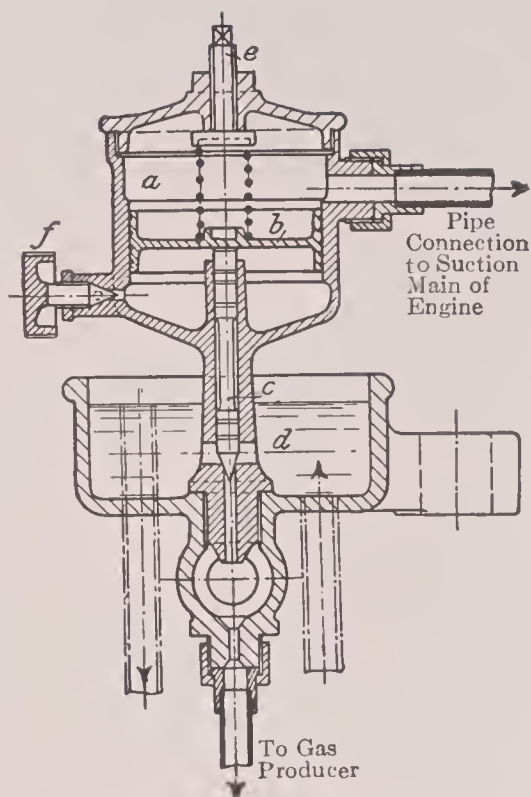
Water Supply Valve, Schweiz. Locomotiv- und Maschinenfabrik, Winterthur.
